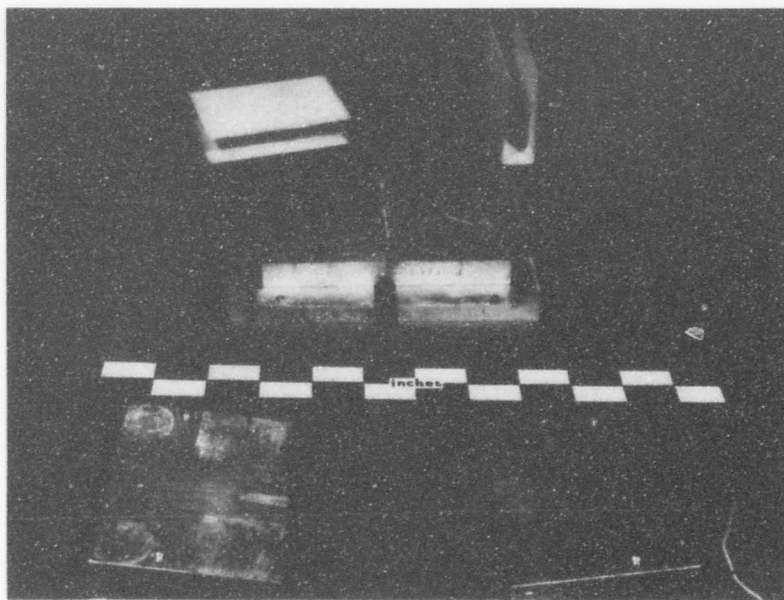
Exploded View of Aluminum Matched Metal Molds Used To Fabricate End Attachments.
